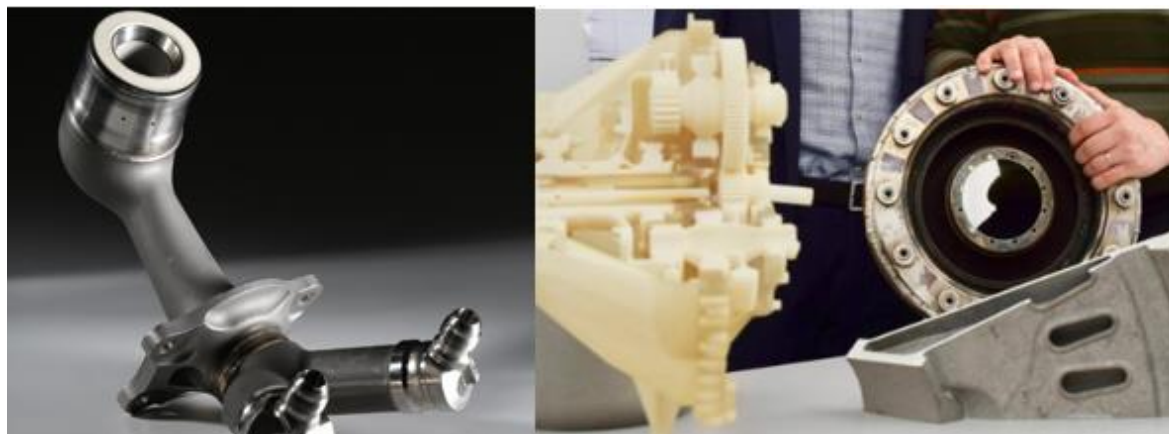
Parts manufactured by the company GE using metal 3D printing technology.
